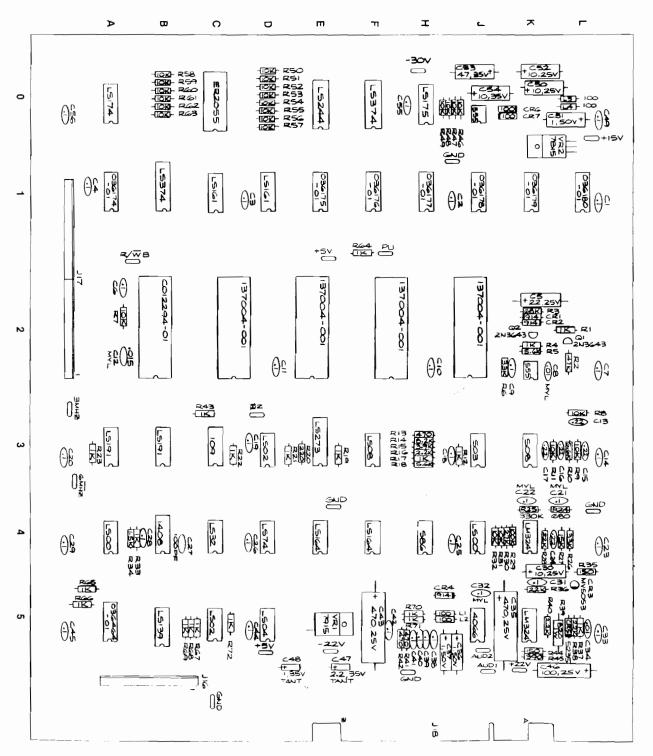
Red Baron[™] Auxiliary PCB Assembly A036305-01 A
